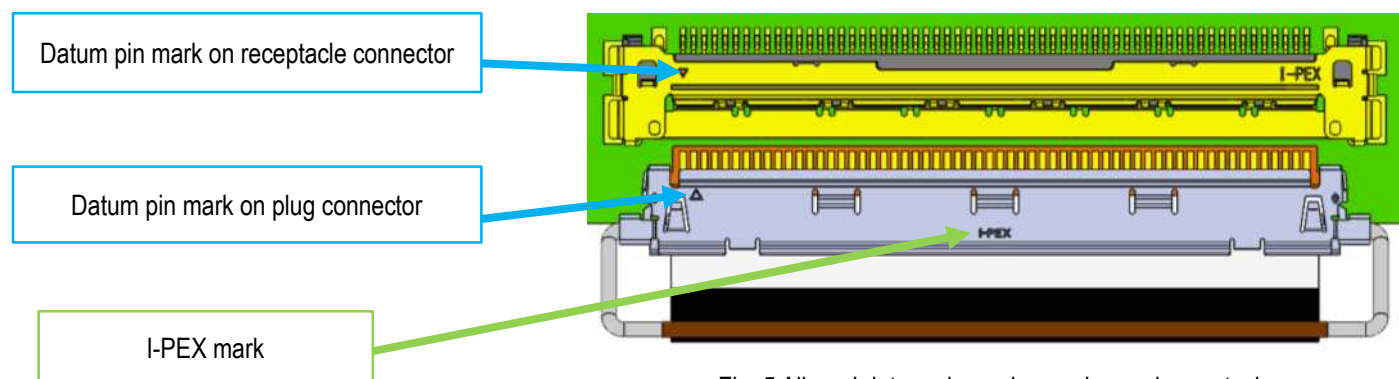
Aligned datum pin marks on plug and receptacle
